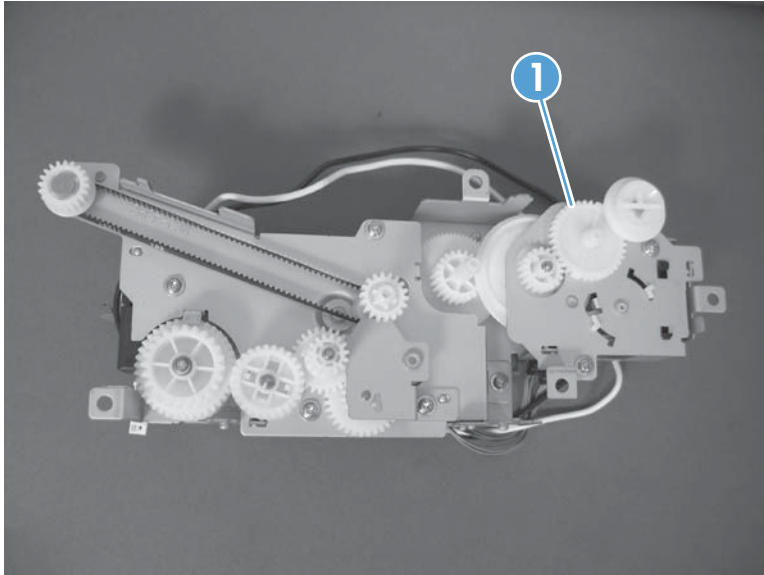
Remove the fuser drive assembly (6 of 6)
